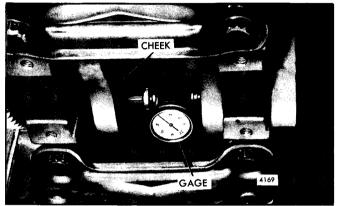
Crankshaft Distortion Measuring Gage Mounted on Crankshaft
